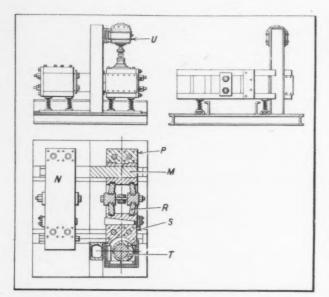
General Arrangement of the TsNIITMASh Type YP 200 Fatigue Testing Machine, for Specimens with Cross-sections up to 11 11/16 in. by 7½ in. The Specimen is Subjected to Continuous Reverse Bending in the Horizontal Plane
